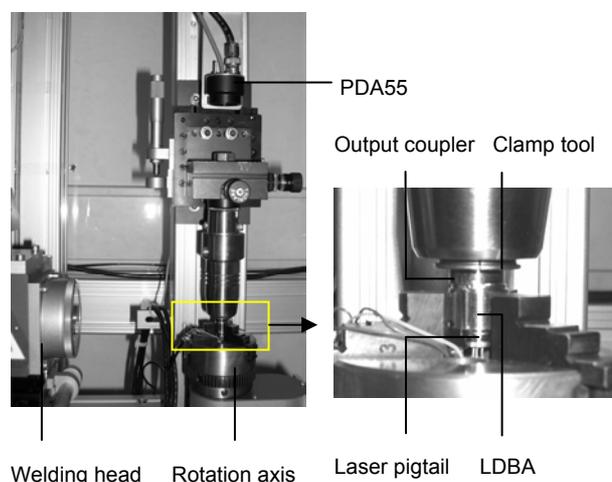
Laser fine welding station with pulsed Nd:YAG-Laser (left) and LDBA alignment set-up (right).
